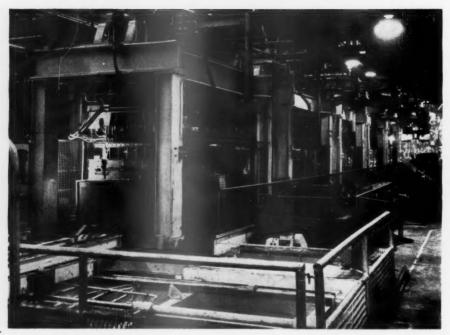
Underbody weld-press line General view from unloading end, showing trolley on return conveyor
